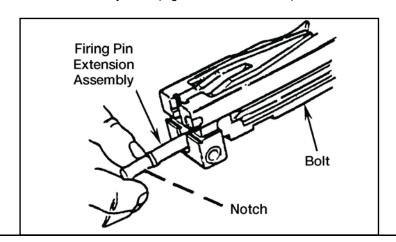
Installation of the firing pin extension assembly
